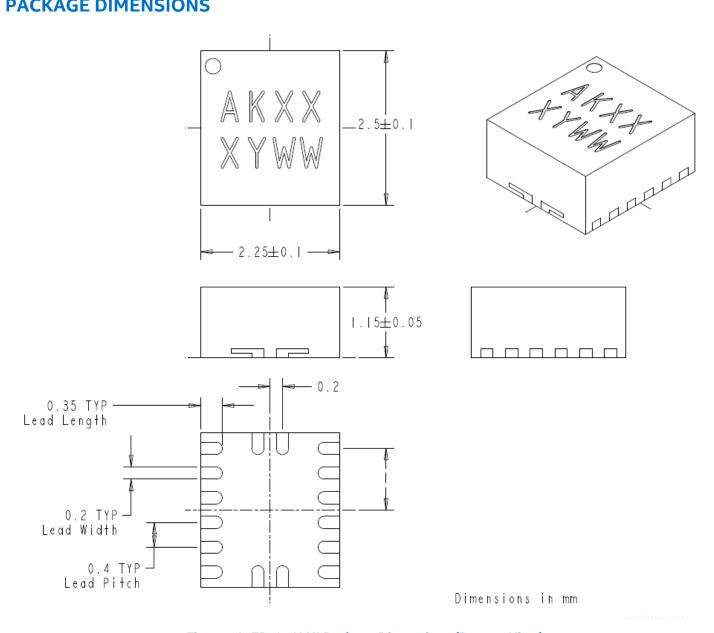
EP5358LUI Package Dimensions (Bottom View)
